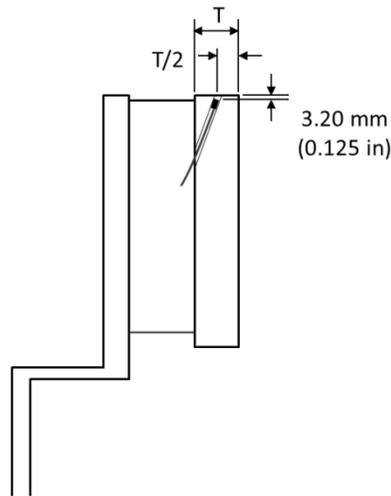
PLUG-TYPE THERMOCOUPLE FOR BRAKE ROTOR
